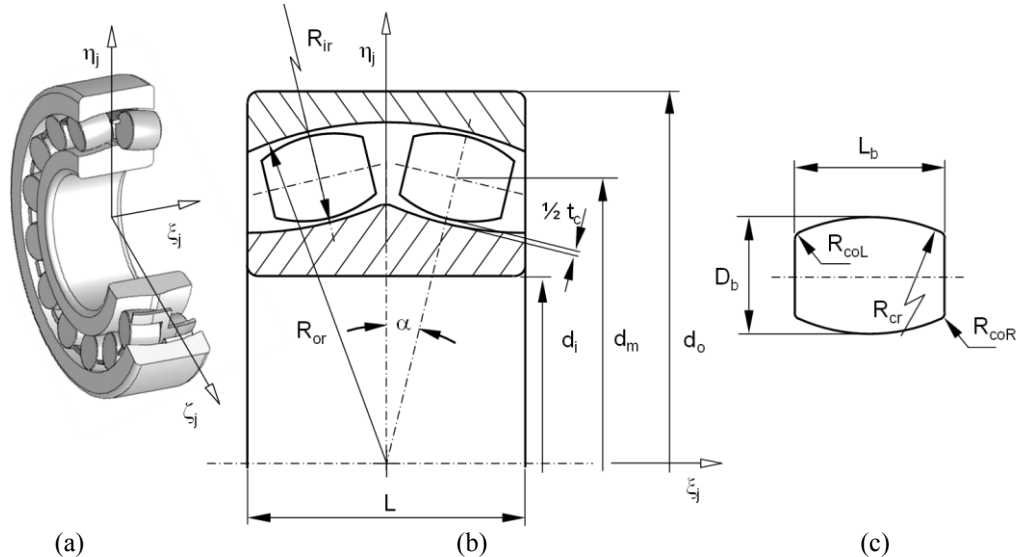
Spherical roller bearing: (a) Perspective view; (b) Bearing dimensions; (c) Roller dimensions.
